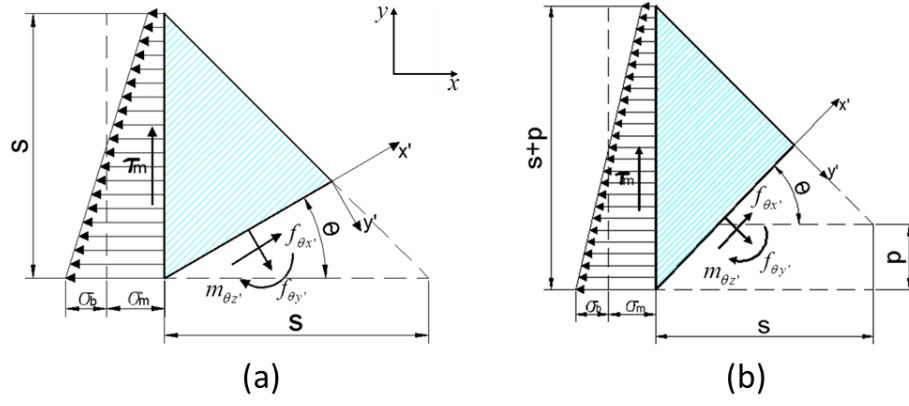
Analytical fillet weld model: (a) fillet weld without penetration; (b) fillet weld with penetration, p
